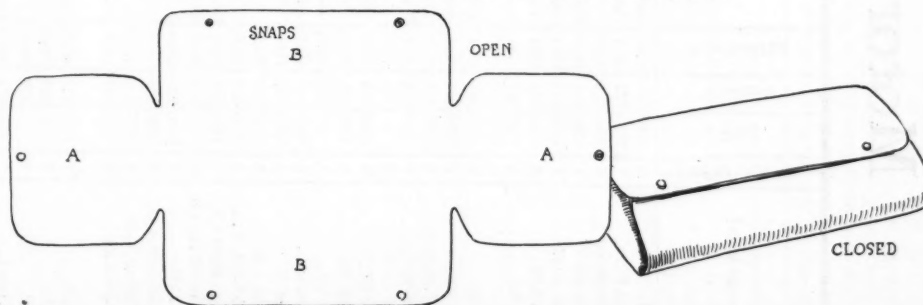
Suggestion for making tube carrier out of top scraps, etc.
